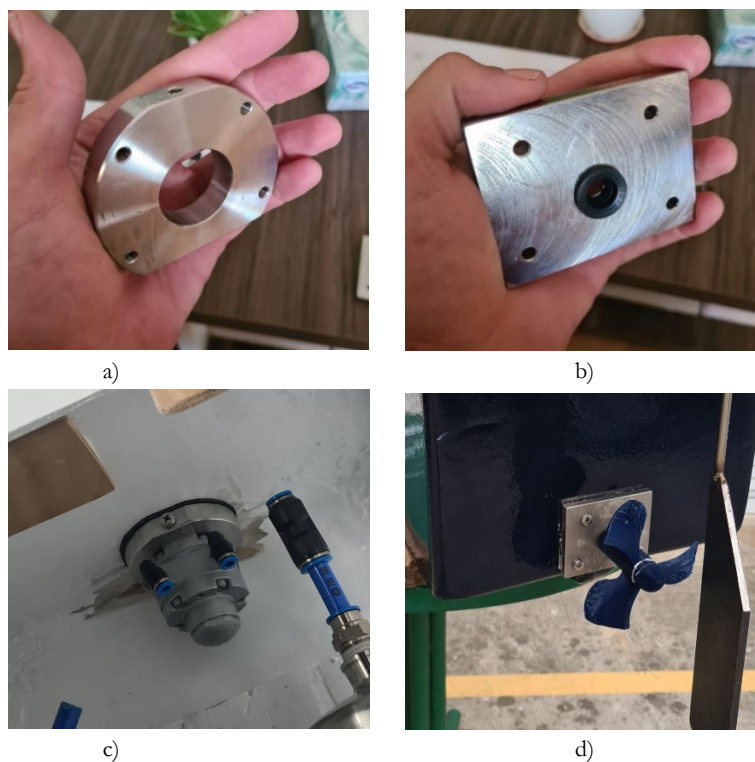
Boat propulsion parts, a) front support part, b) rear support part, c) air motor, d) propeller
